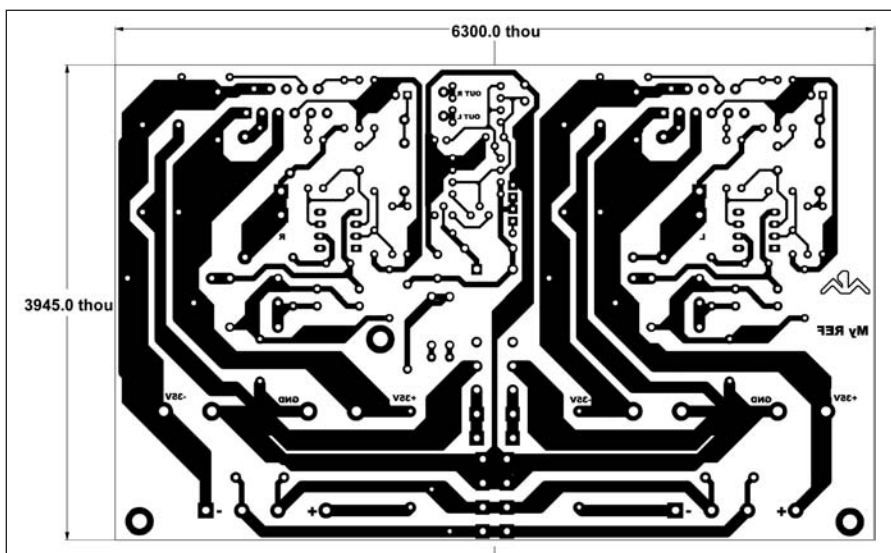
PCB solder side. Actual dimensions: 100 × 160mm.
